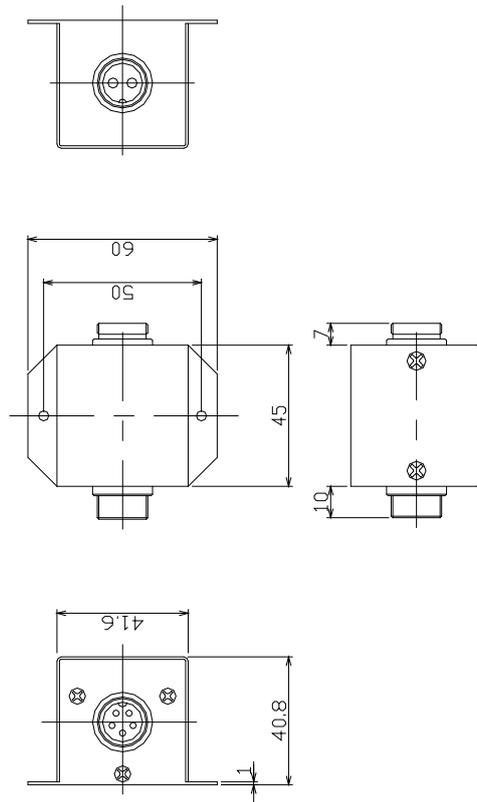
Dimensional drawing for measuring unit GP-BH
